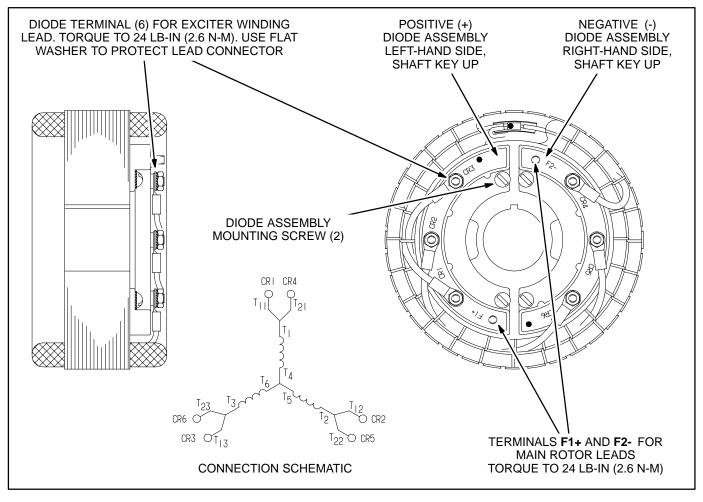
ROTATING RECTIFIER ASSEMBLY
